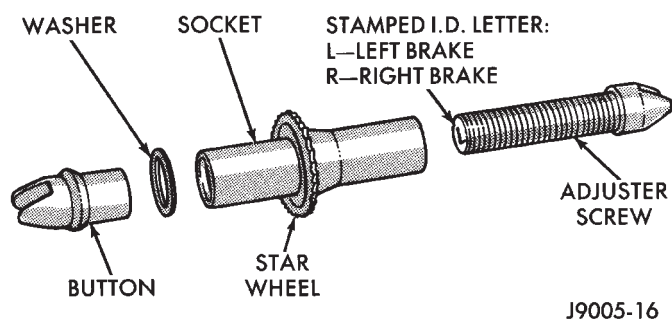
Adjuster Screw Components (9-Inch Brake)
